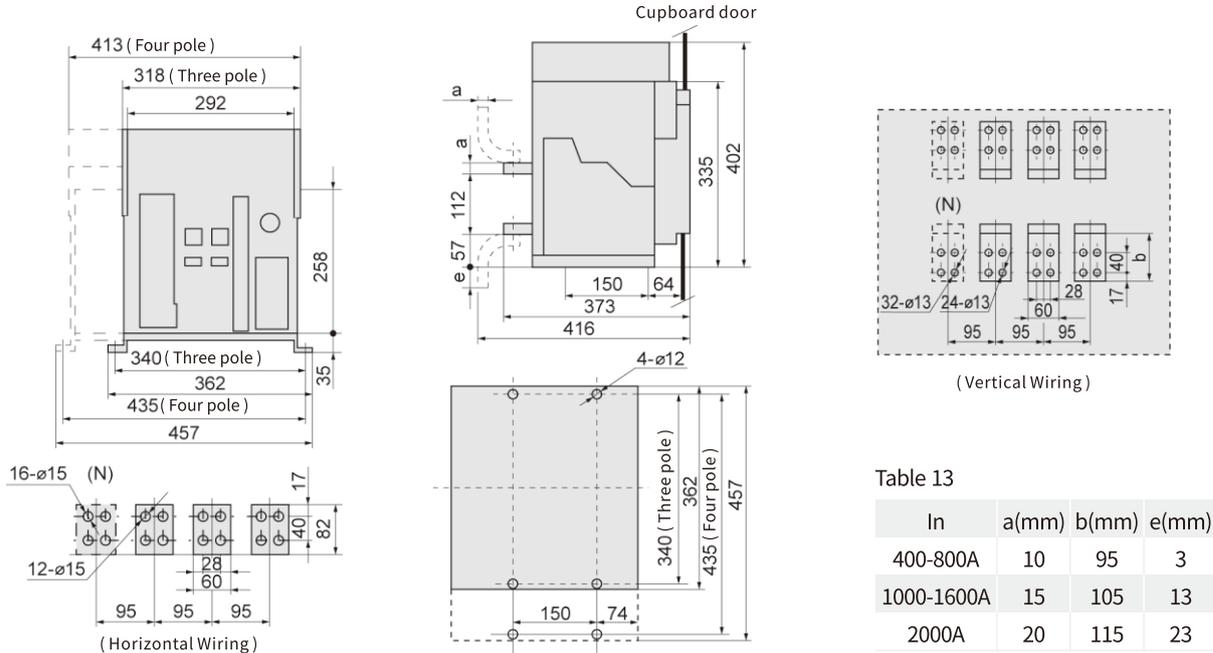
Outline and installation dimensions of fixed type circuit breaker (EKA1-2000, 2000/4)
